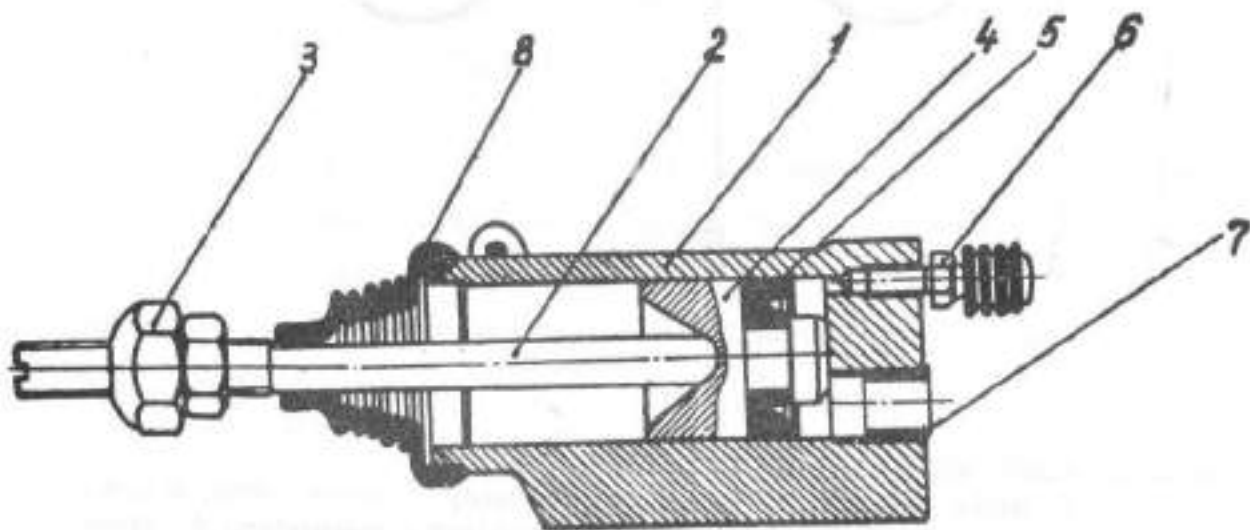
46. CLUTCH CONTROL CYLINDER.
